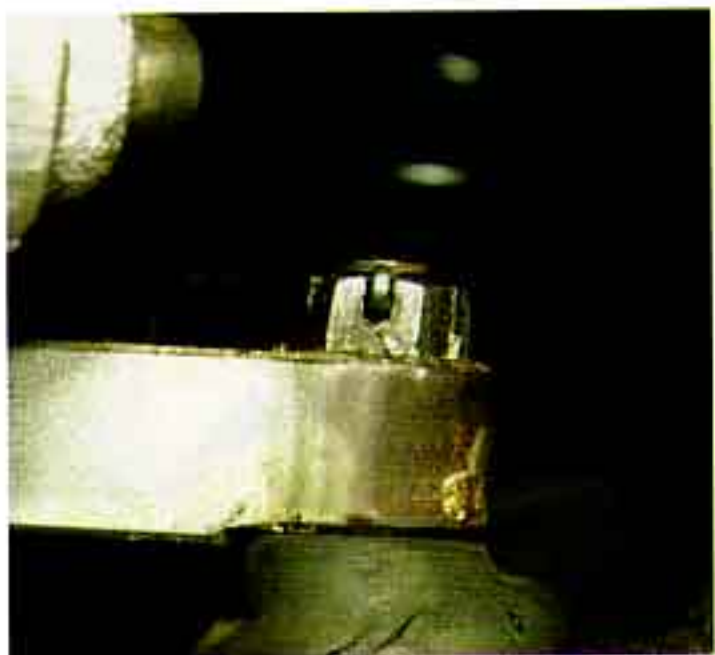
Install the outer tie rod end, nut and new cotter pin.
